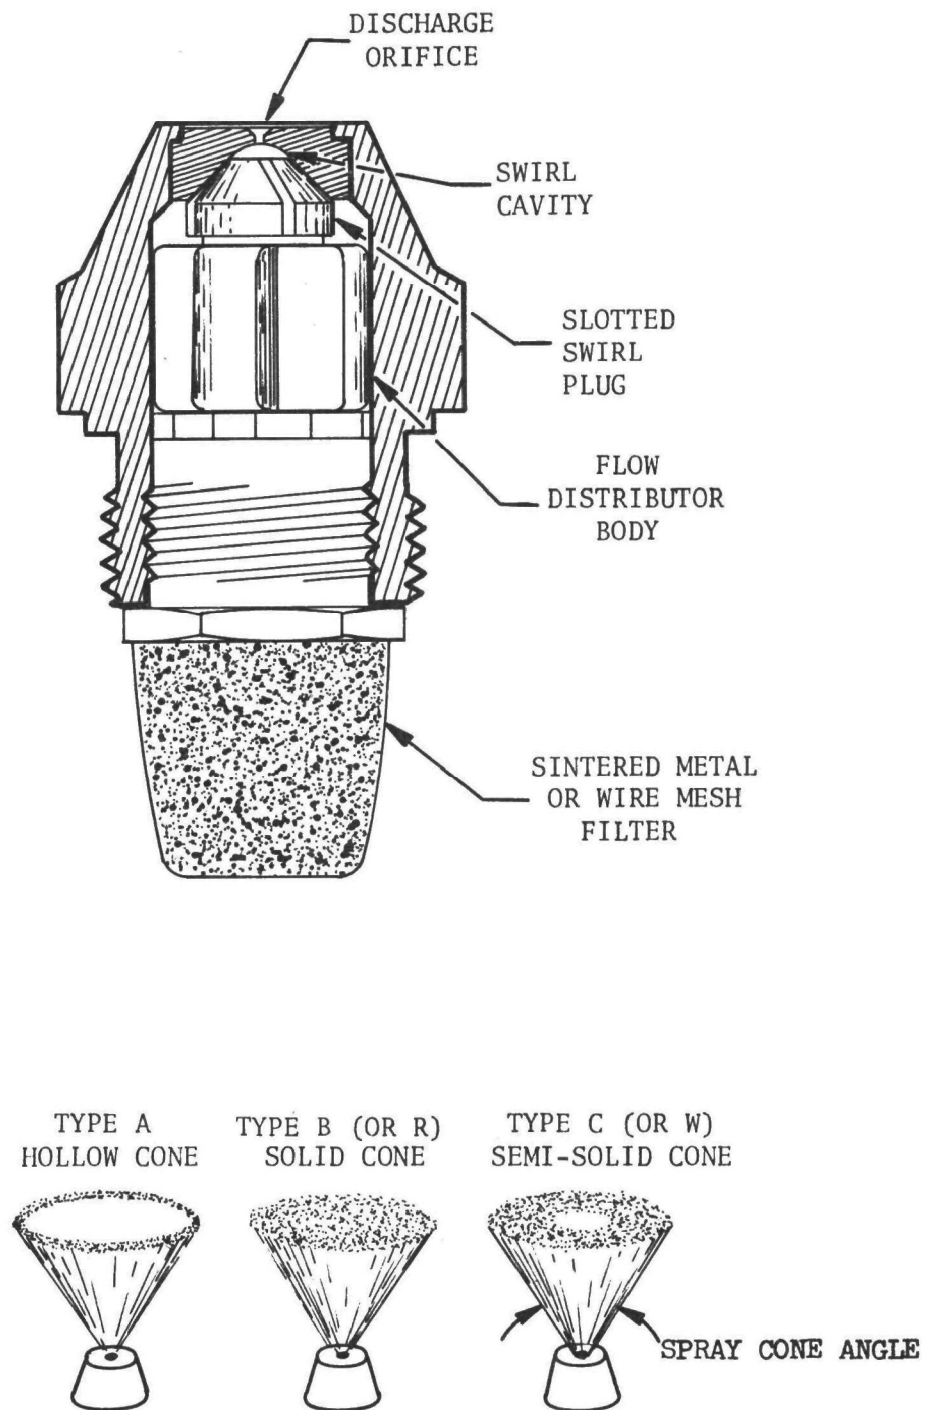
Cross-sectional schematic showing the internal construction of a typical high-pressure oil atomizing nozzle and the various spray cone patterns
